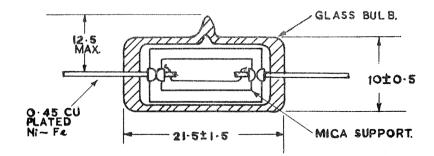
FIG. IA PART VIEW SHOWING TAG DIMENSIONS.
